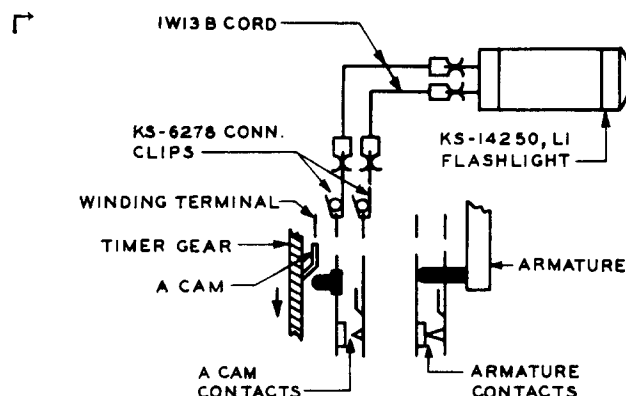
Connections for Checking "A" Cam Contact Closure
